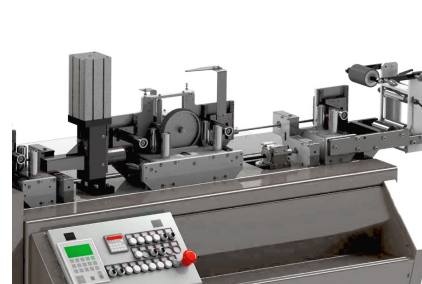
Central adjustment of the guide rollers optional motor driven version available
